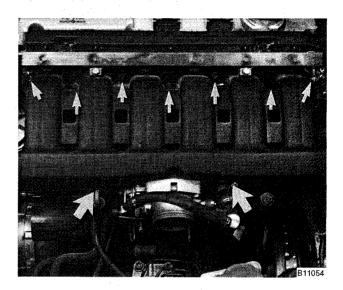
Intake manifold nuts and support bracket bolts (arrows).
